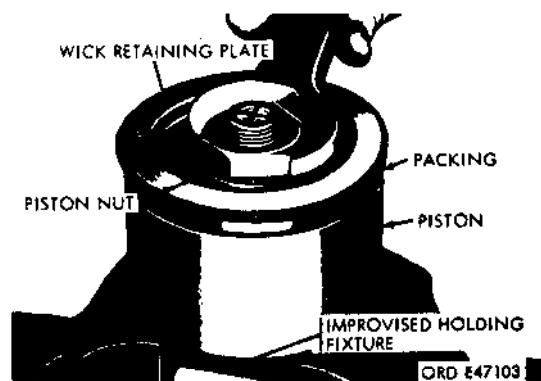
Disassembling air-hydraulic (Air-Pak) power cylinder piston, using improvised holding fixture.
